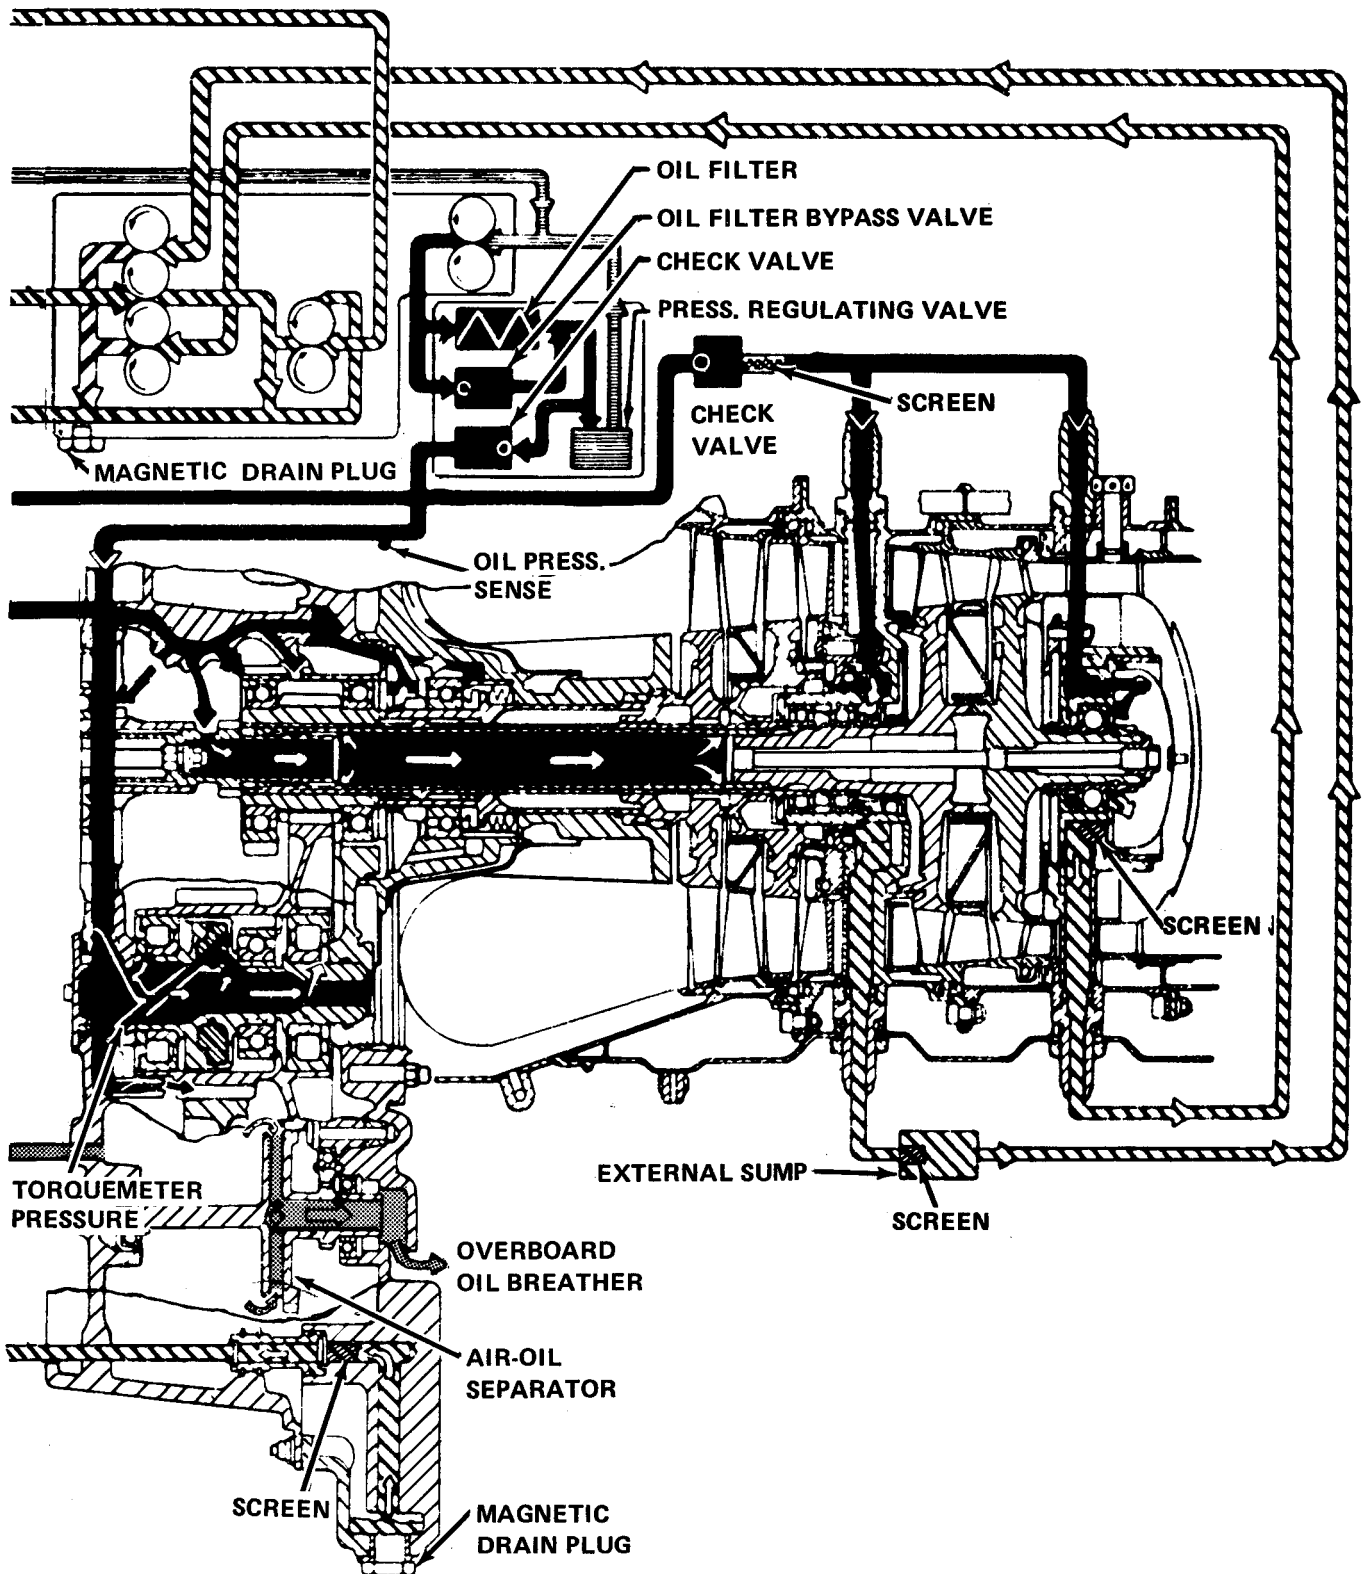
Engine Lubrication Schematic (Sheet 2 of 2)
